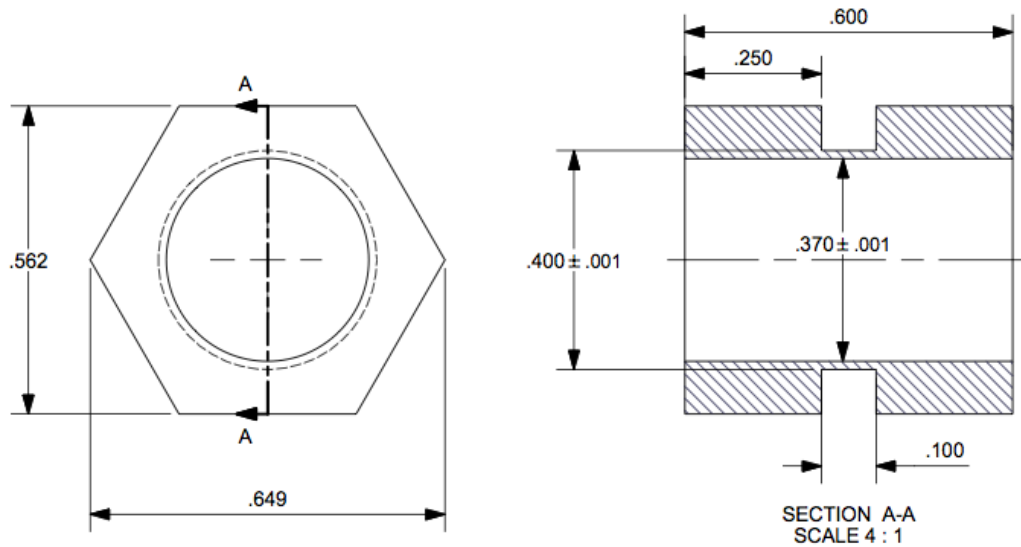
AFRL Tubular Specimen with Hexagonal Flange [5]
